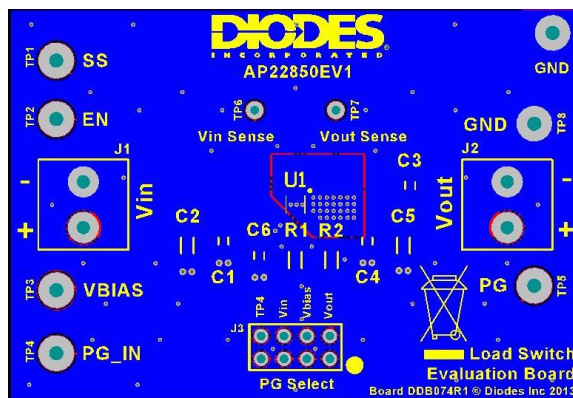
PCB Copper Layout & Silk Screen – Bottom
